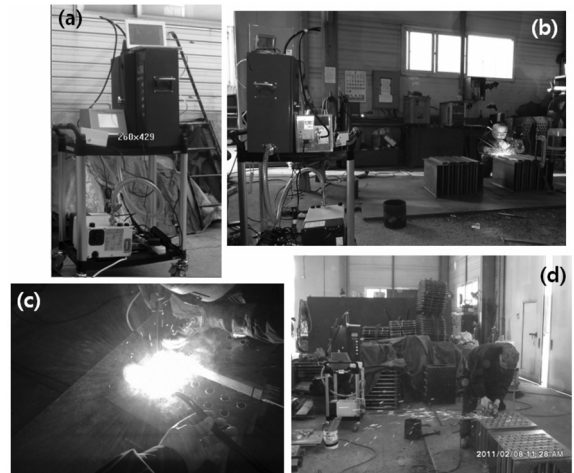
Various process of welding factory. (a) Electrical low pressure impactor (ELPI) on mobile sampling cart (b) welding process for area sampling (c) welding process for personal breathing zone (d) grinding process.
